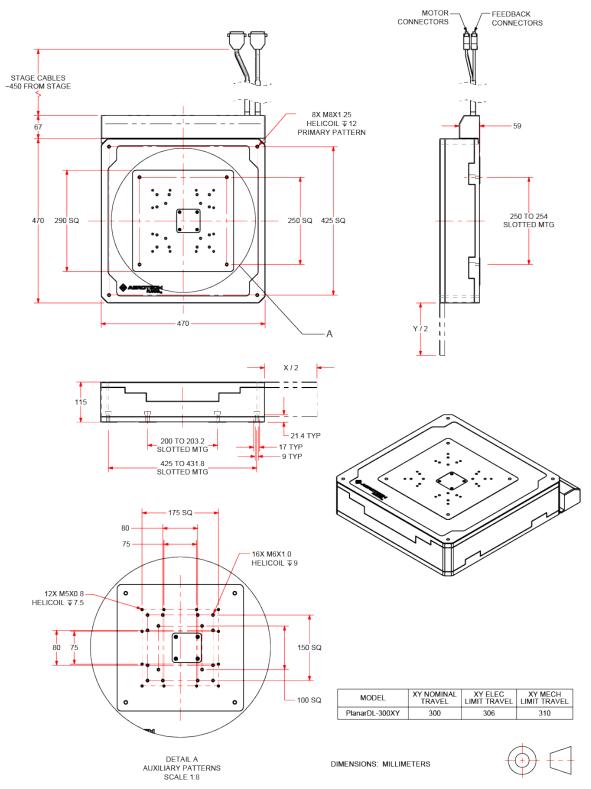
PlanarDL-300XY Dimensions without Cable Management
